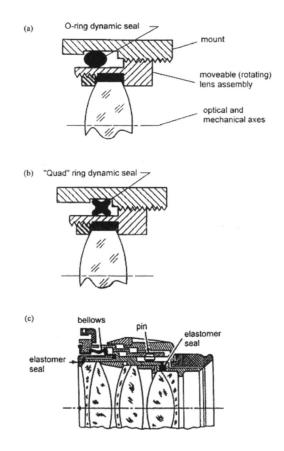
Three techniques for dynamic sealing of a moving subassembly: (a) With an O-ring, (b) With a "quad" ring, and (c) with a flexible bellows. View (c) is from Quammen et al.⁶
